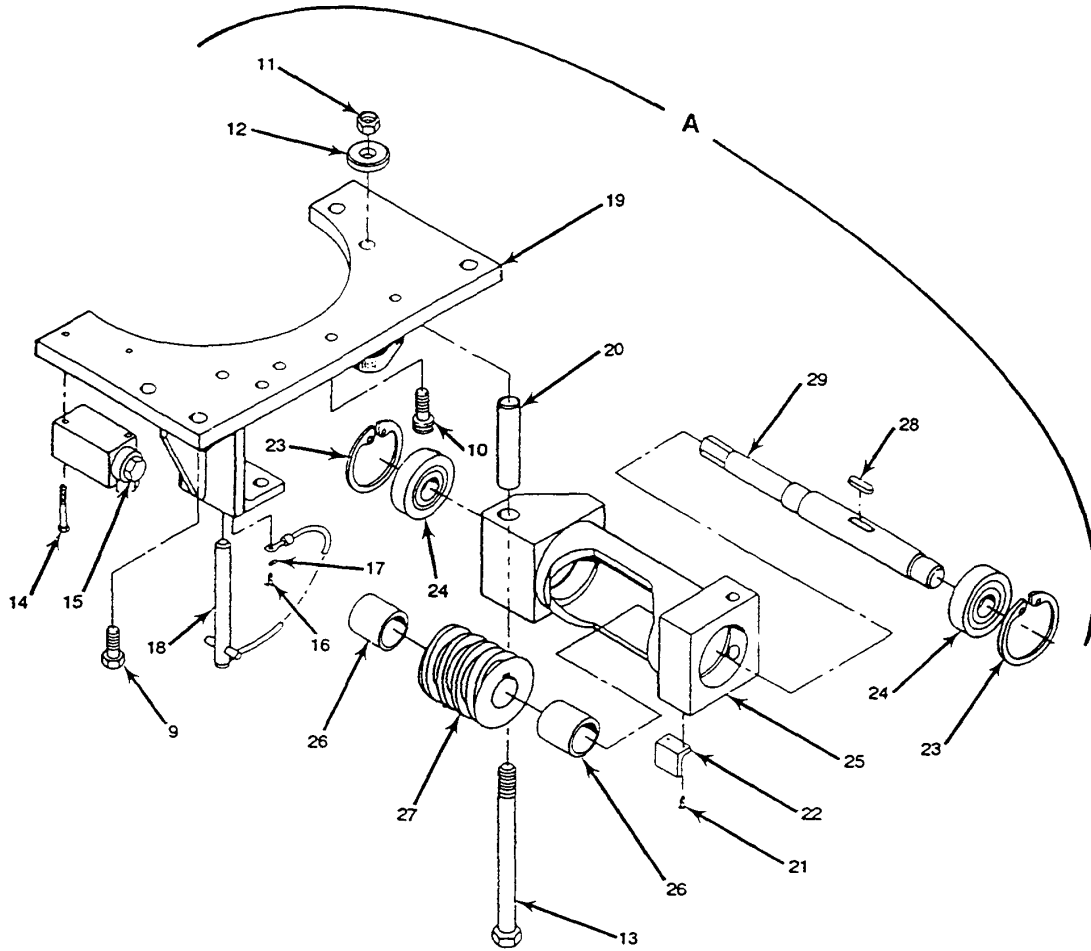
Sliding Padeye Assembly, Models B-9A, B-12 (Sheet 2 of 2)
